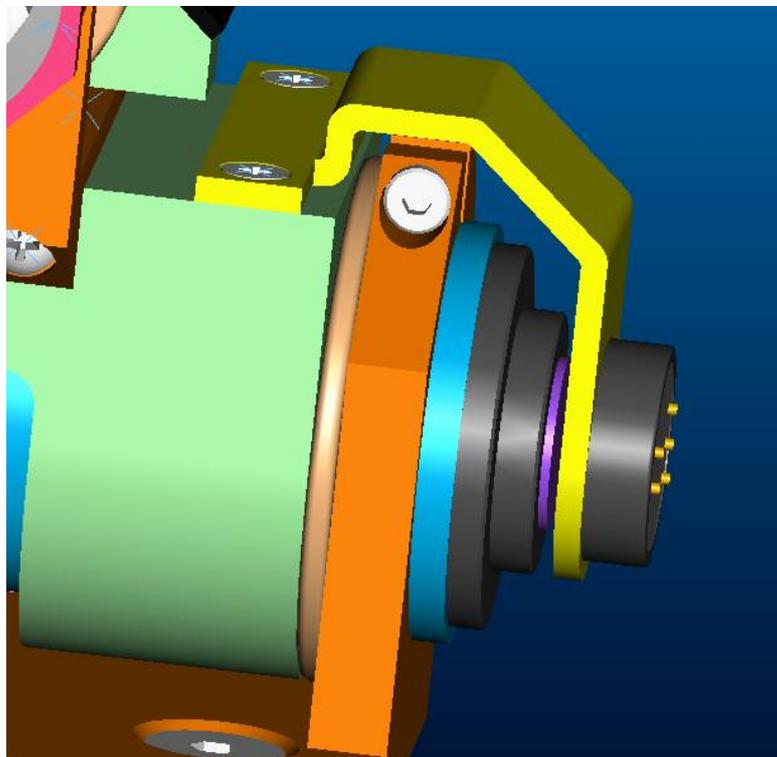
Mechanical assembly of the GMW360ASM and ultra-thin magnet in the iCub head.
